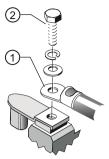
Connection with cable lug and fixing screw (schematic diagram)
